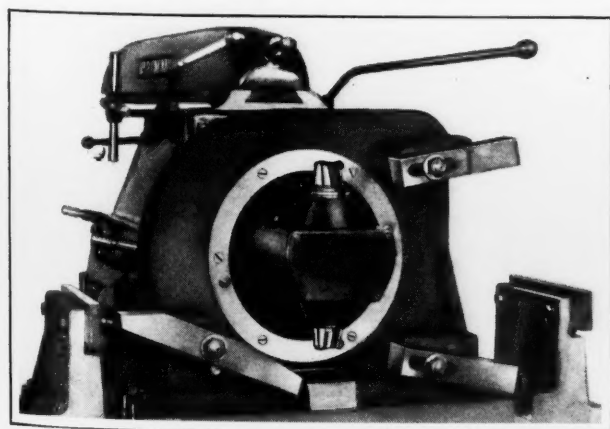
Milling Fixture Used in Cutting Clearance Notches in Rear Axle Housing Shown in Fig. 12
